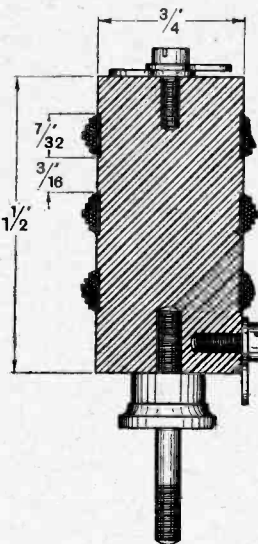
Sectional sketch showing construction of the H.F. choke.
